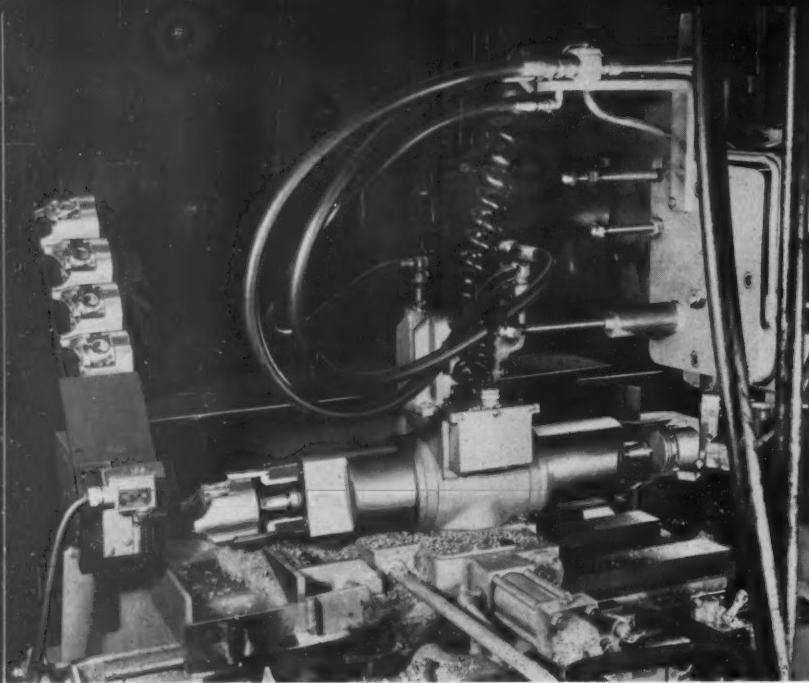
Cast-aluminum pistons are automatically picked up one at a time from magazine at left and loaded into chuck of lathe by indexing fixture.
